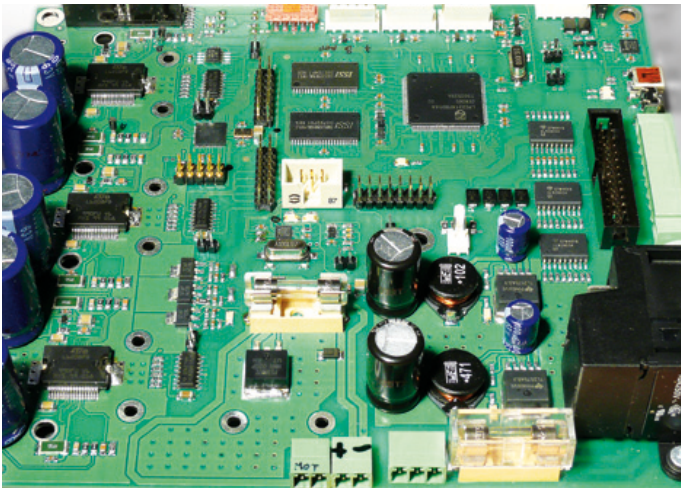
The PCB Prototyper controller board is built around a 32-bit RISC processor and an FPGA.
